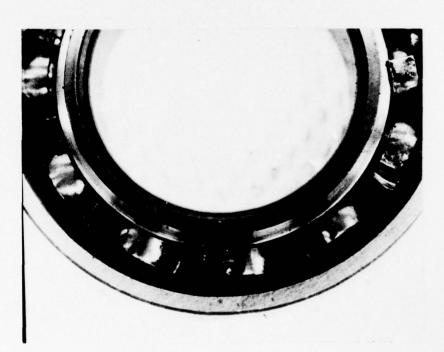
Bearing S/N TRL-11. Removed Position 6 With 4.8 Hours Time. 2.5x Enlarged View.
